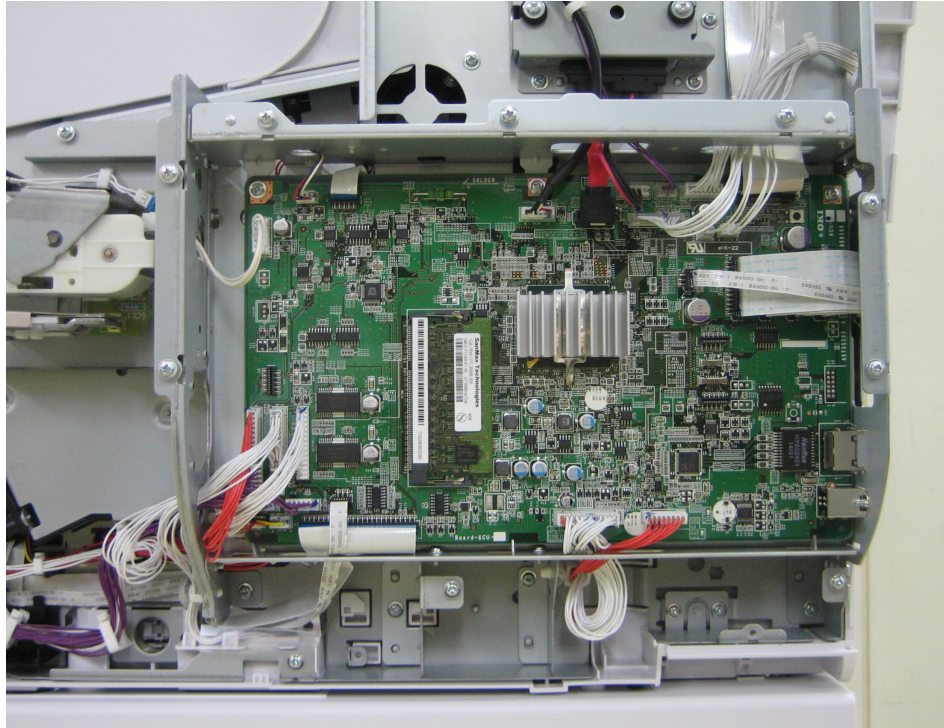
Main Board Assy., Cable Route Diagram
